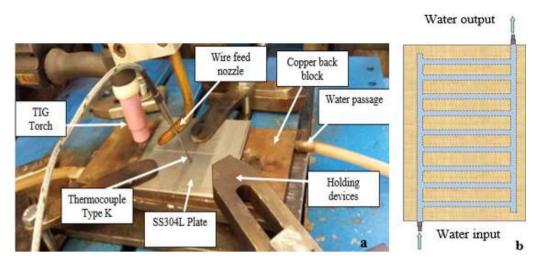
(a) TIG welding experimental setup and (b) schematic illustrates the water cooling system
